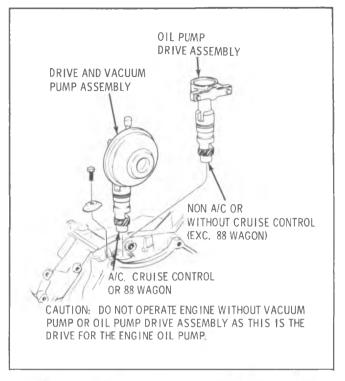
Drive and Vacuum Pump/Oil Pump Drive
